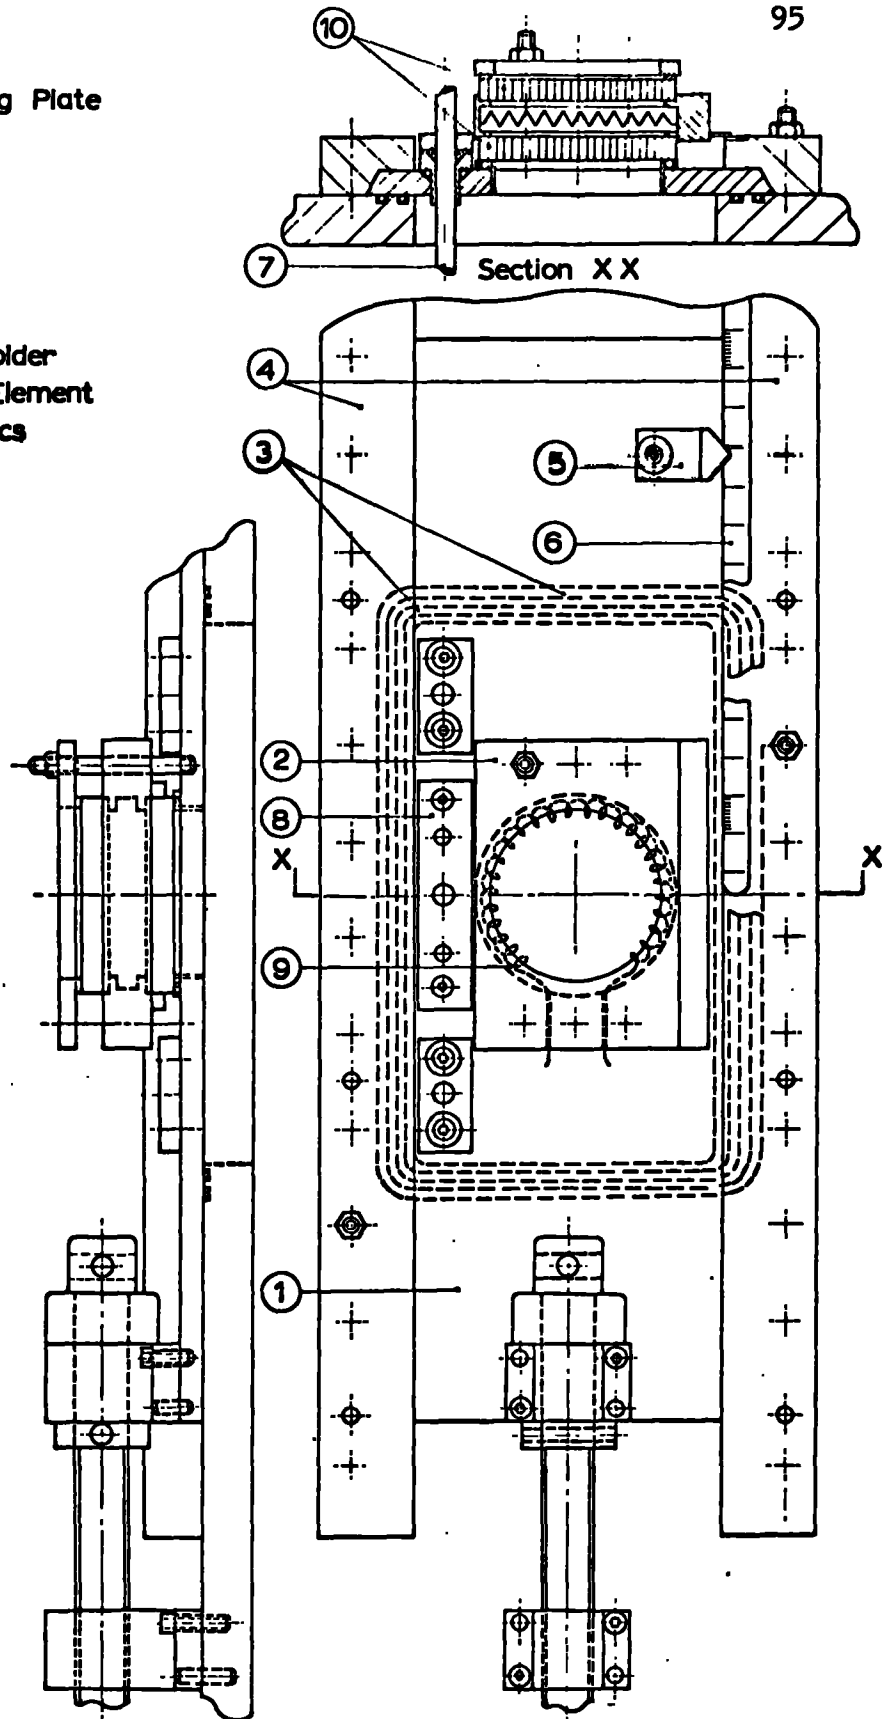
THE SLIDING PLATE ASSEMBLY
